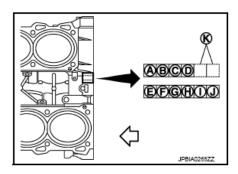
Identifying Housing Grade And Bore Grade On Cylinder Block Courtesy of NISSAN NORTH AMERICA, INC.
